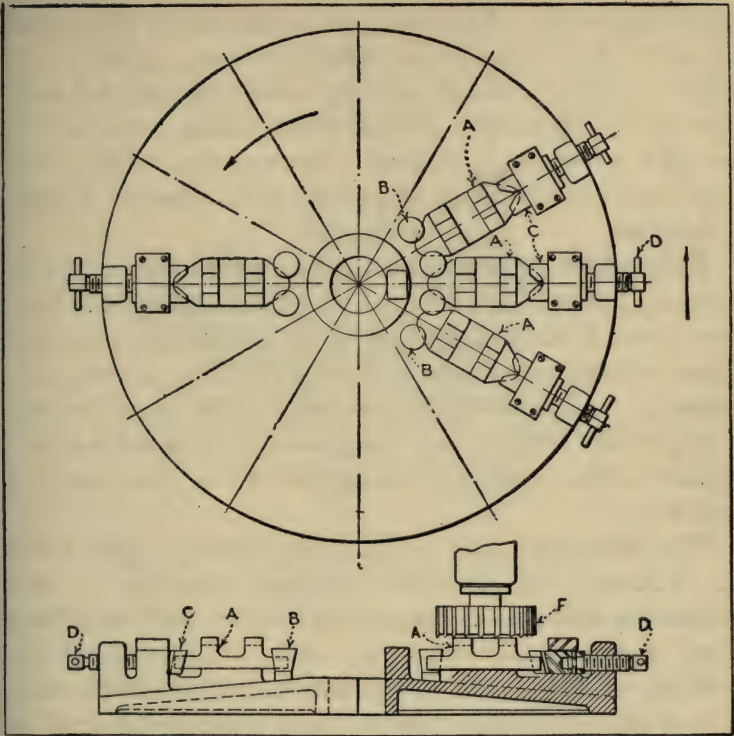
CONTINUOUS MILLING FIXTURE FOR BECKER MILLING MACHINE
